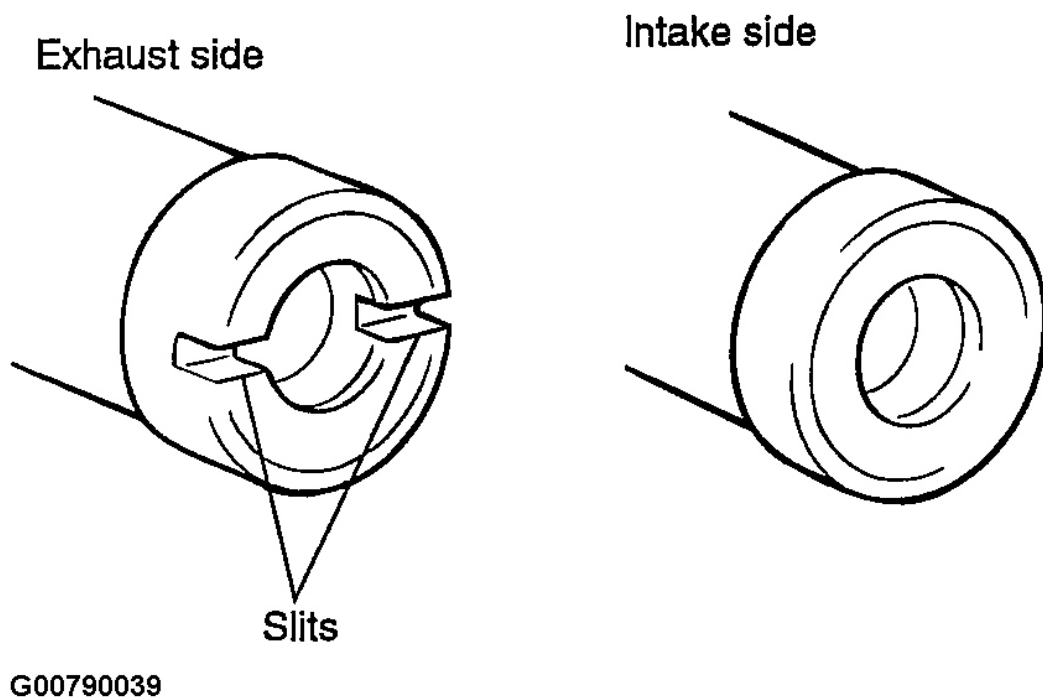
Identifying Camshaft Journals & Lobes
